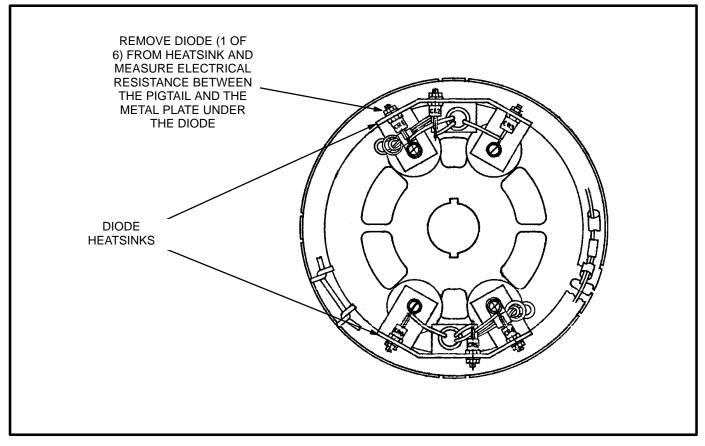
TESTING THE ROTATING RECTIFIER ASSEMBLY
